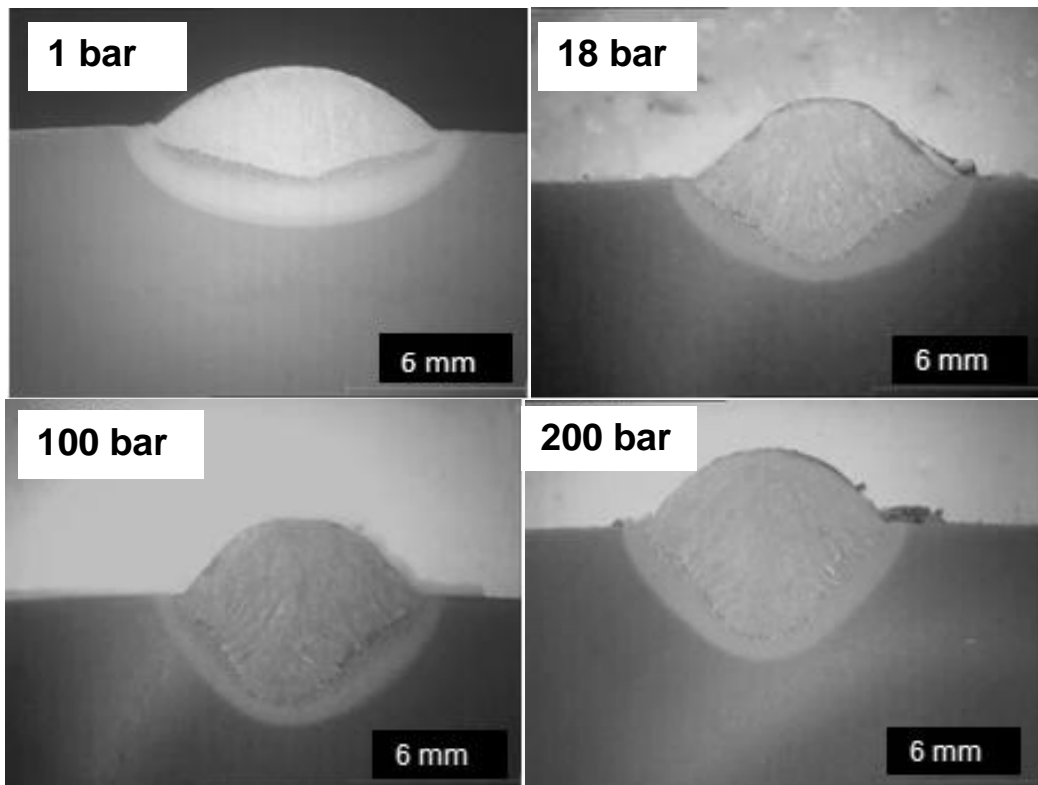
Macrographs of welds made with 8 m/min WFS and 7 mm/s welding speed for the 25 mm plate thickness
